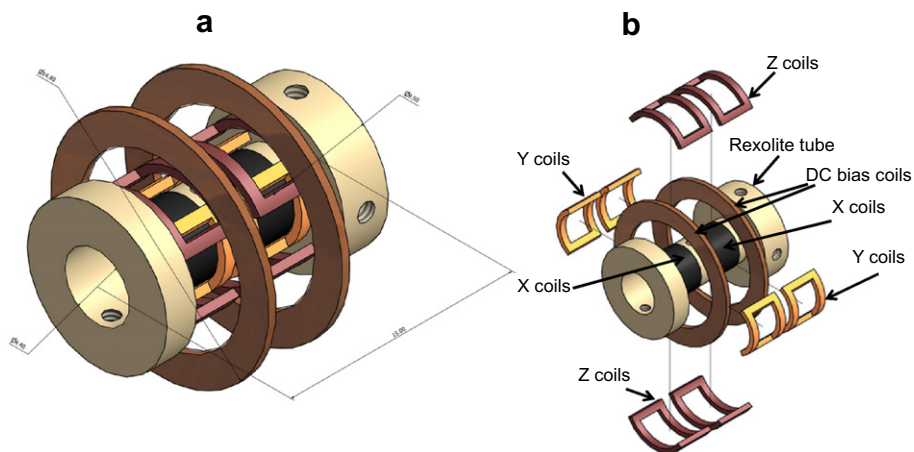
(a) The gradient coil structure. (b) Enlarged drawing of the gradient coil structure. X coils are in black – Maxwell pair; Y coils are shown in yellow – Golay gradient coils; Z coils are in brown, also Golay geometry; and a regular Helmholtz pair above all coils, to lock the static field on the resonance line (field frequency lock).
